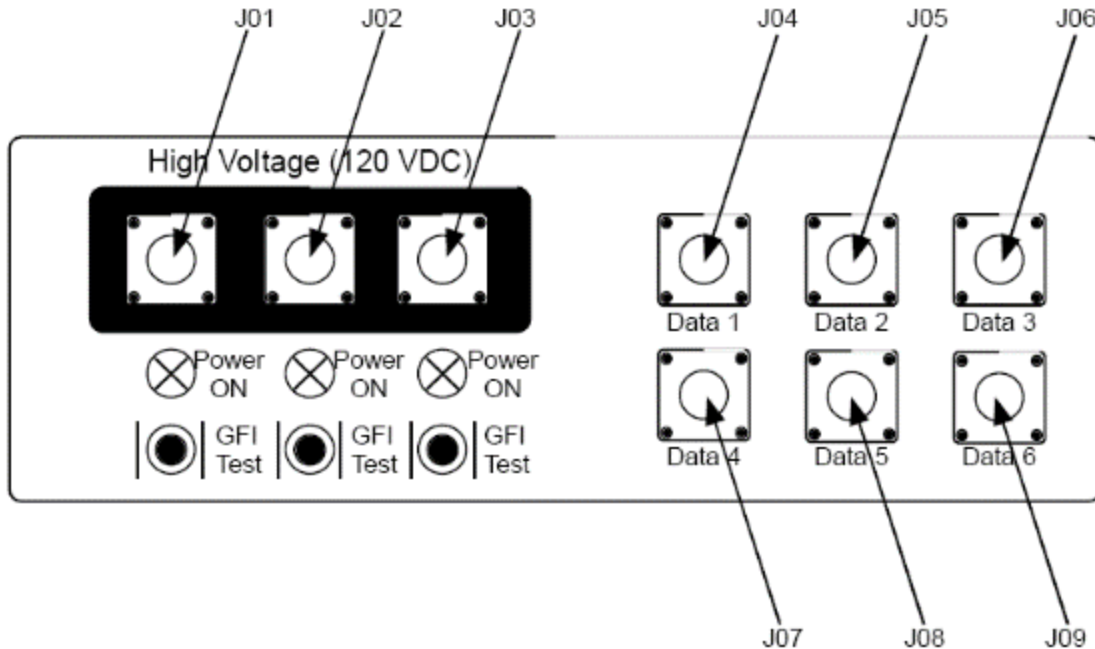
SUP PANEL LAYOUT
